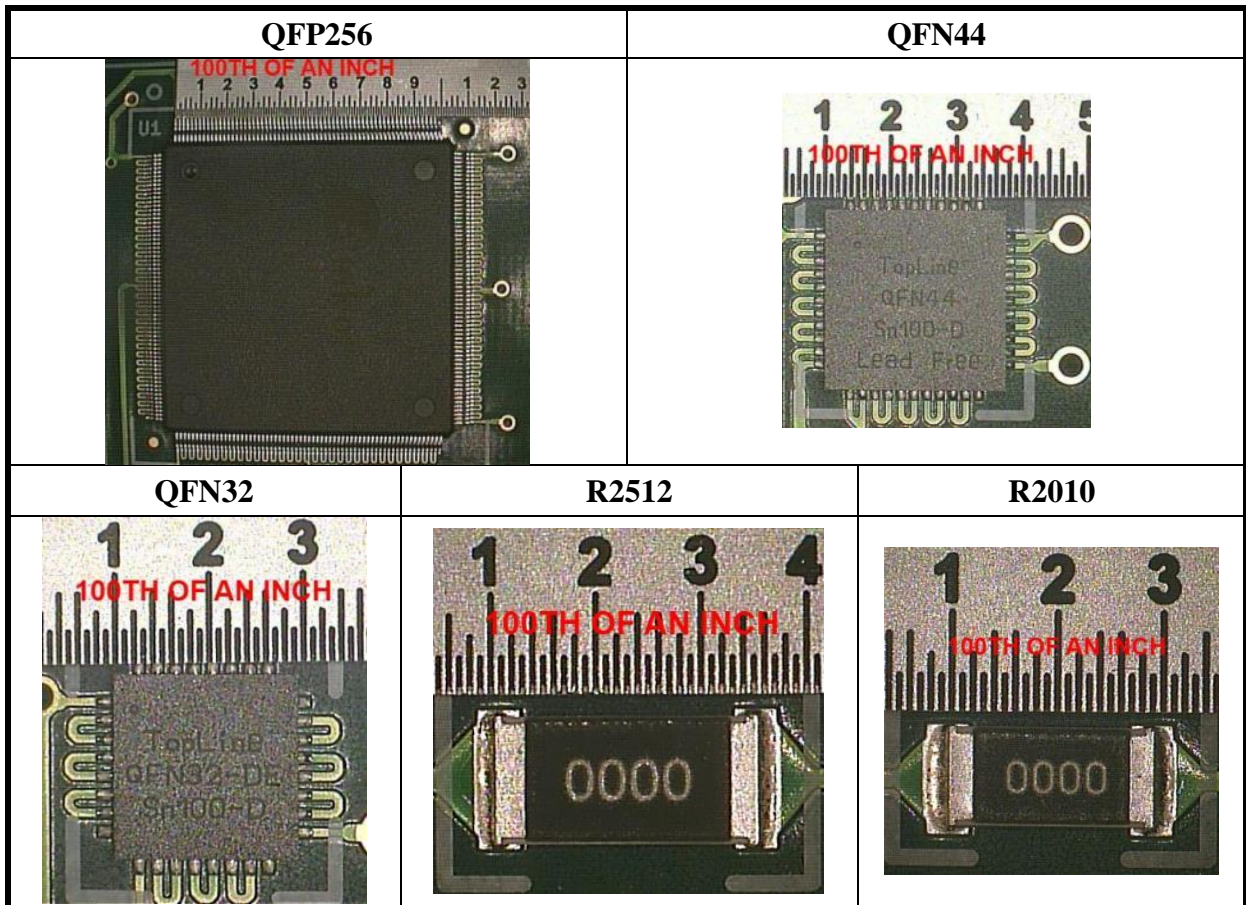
An Enlarge View of Each Package Types after Reflow Assembly
